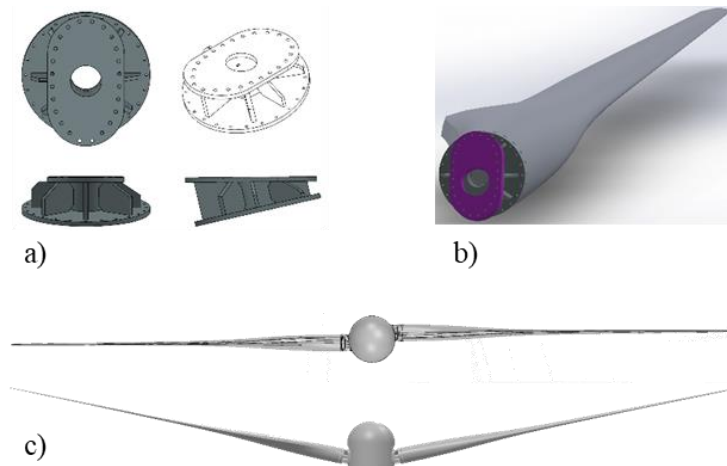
Views of a) the mounting adapter for pre-coning, b) the blade connected to the spindle plate, and c) the rotor downwind rotor view for feathered and above view for run.
